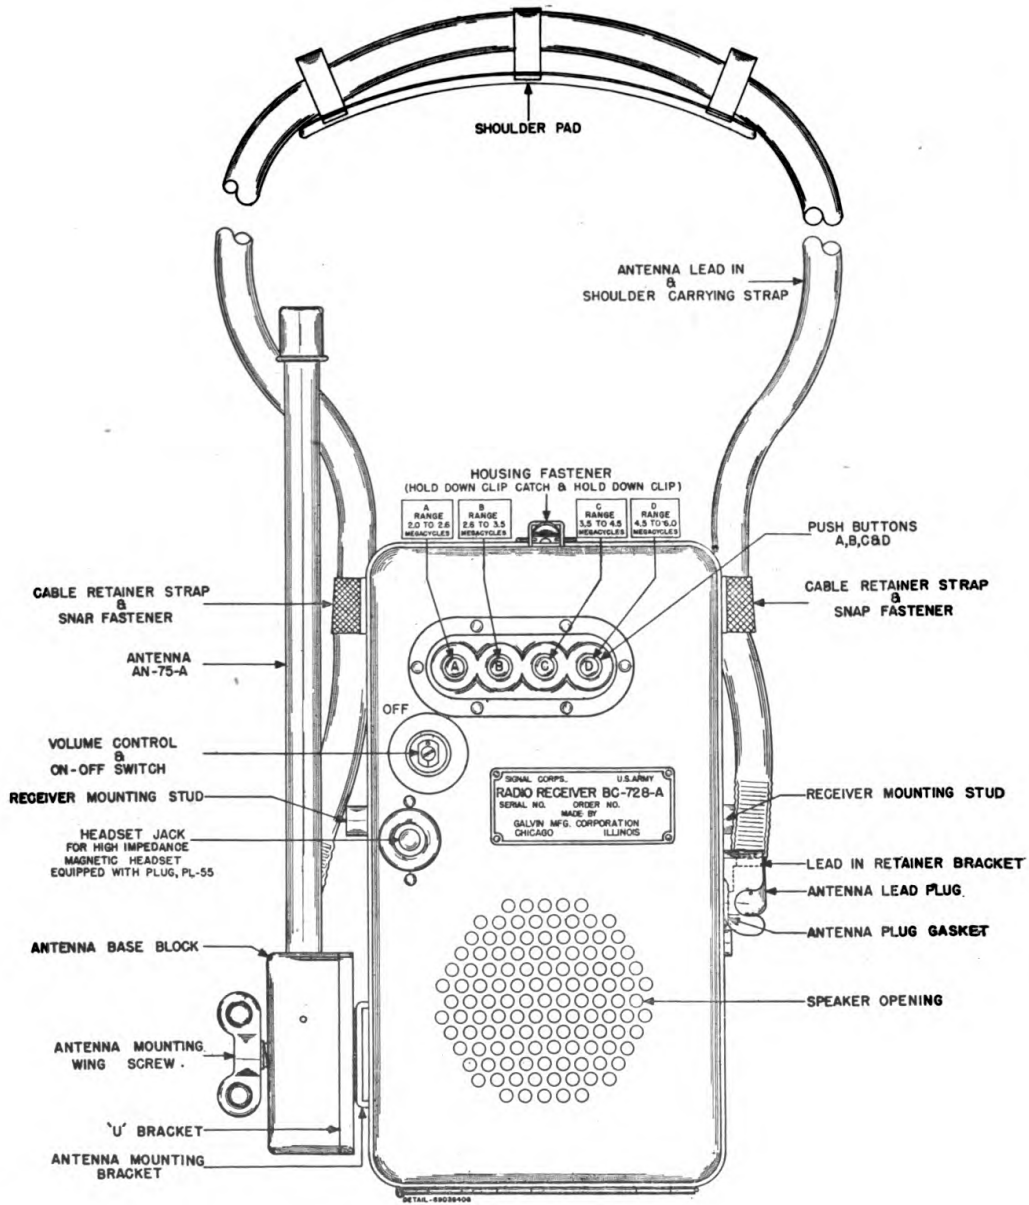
RADIO RECEIVER BC-728-A, FRONT VIEW
